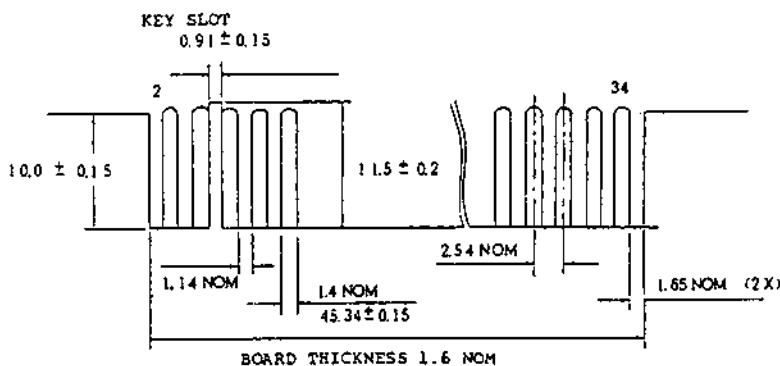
Connector J1 Dimensions (mm) and Pin Numbers
